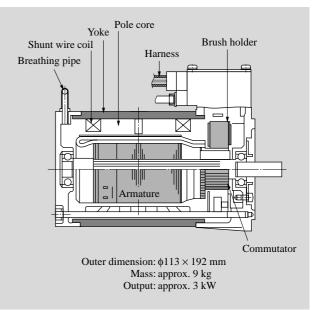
Structure of DC Motor for Rear-wheel Drive. Employing a separately excited DC motor permits shunt wiring control and enables high-speed rotation output.
